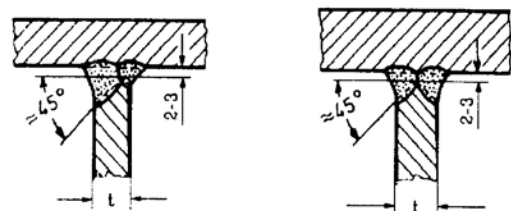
Single-side welds on permanent weld pool support
